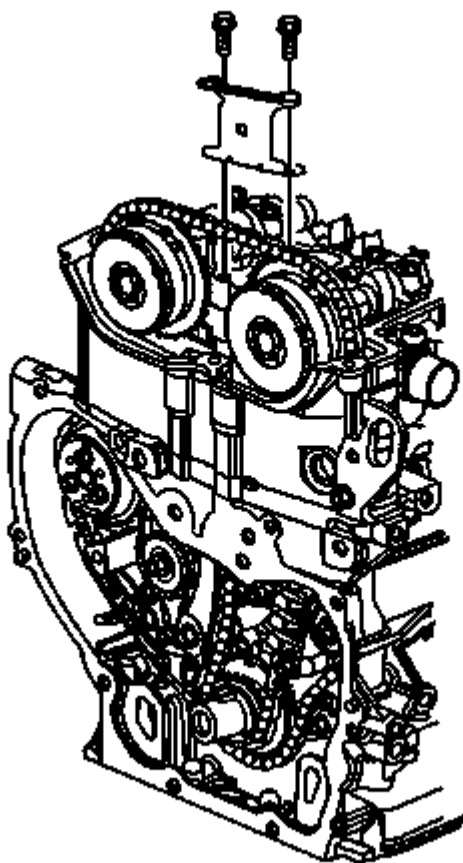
View Of Upper Timing Chain Guide & Bolts
